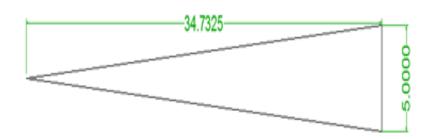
CROSS SECTION OF THE SCREW BLADE
